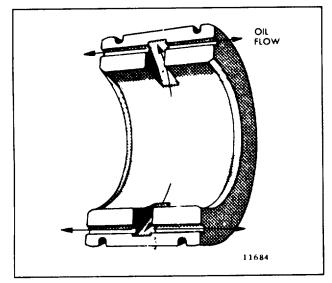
Camshaft Intermediate Bearing (Lower Half)
